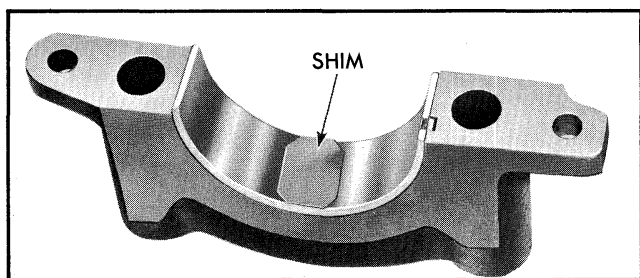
002 Shim Positioned in Cap for Checking Bearing Clearance
